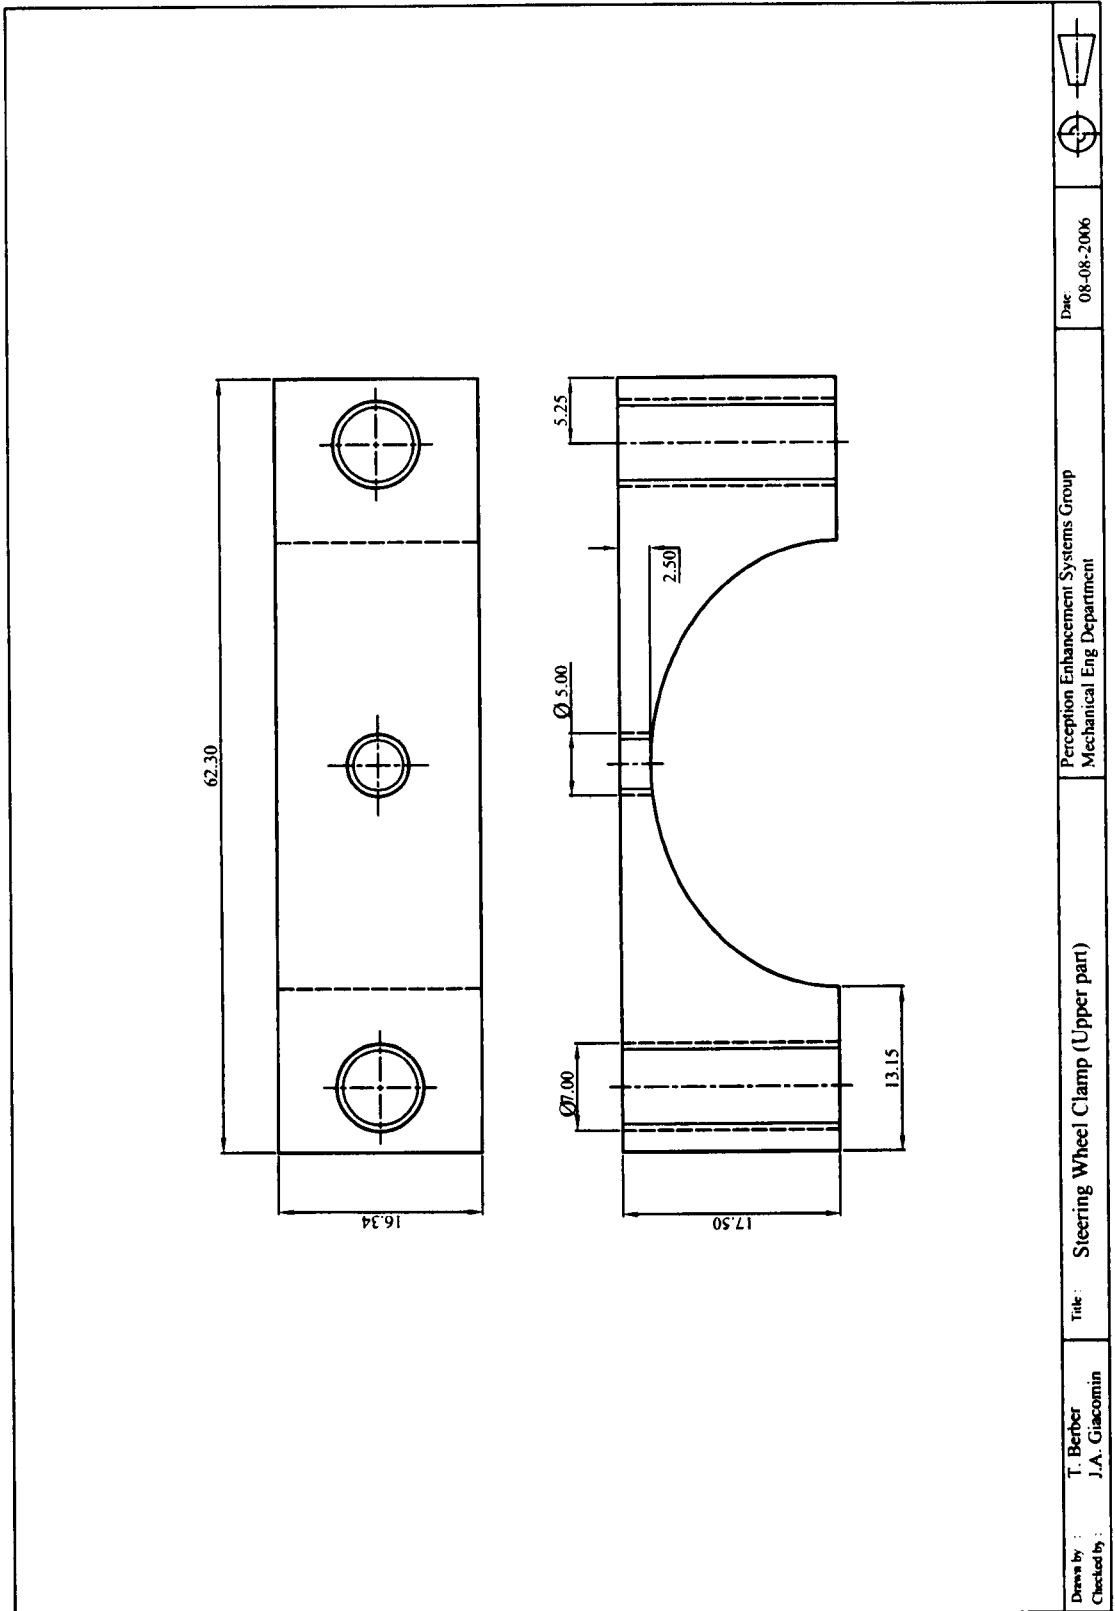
Geometrical dimensions of the upper part of the steering wheel clamp used to measure the steering wheel vibration for the Uxbridge test.
